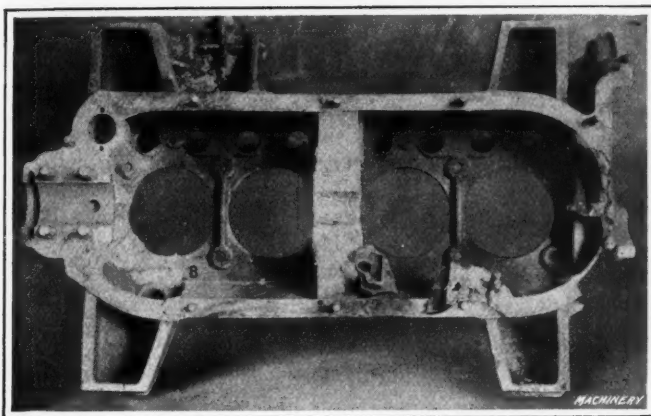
End Bearing finished, Center Bearing built up, and Front Bolting Lug welded
